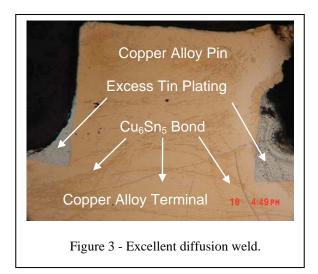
shows a good resistance weld joint (diffusion weld) with a trace of Cu_6Sn_5 intermetallic between the square pin and the bottom terminal.
